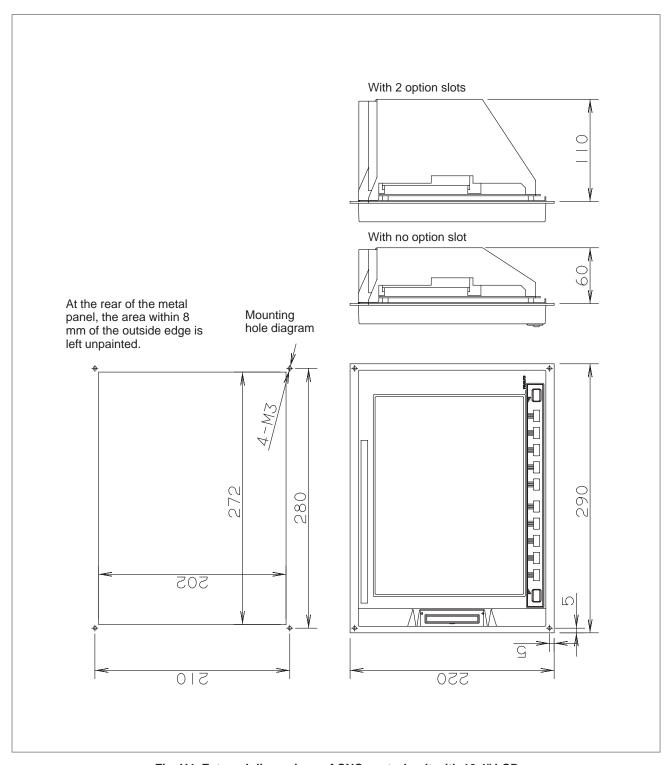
External dimensions of CNC control unit with 10.4" LCD
